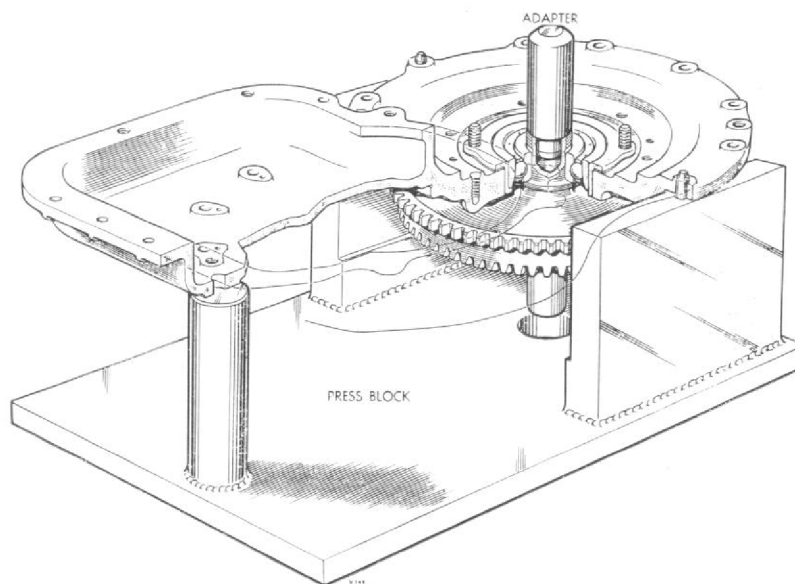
Press block T.77974 and adapter T.77975 for removing hydraulic pump gear from valve group mounting plate.
